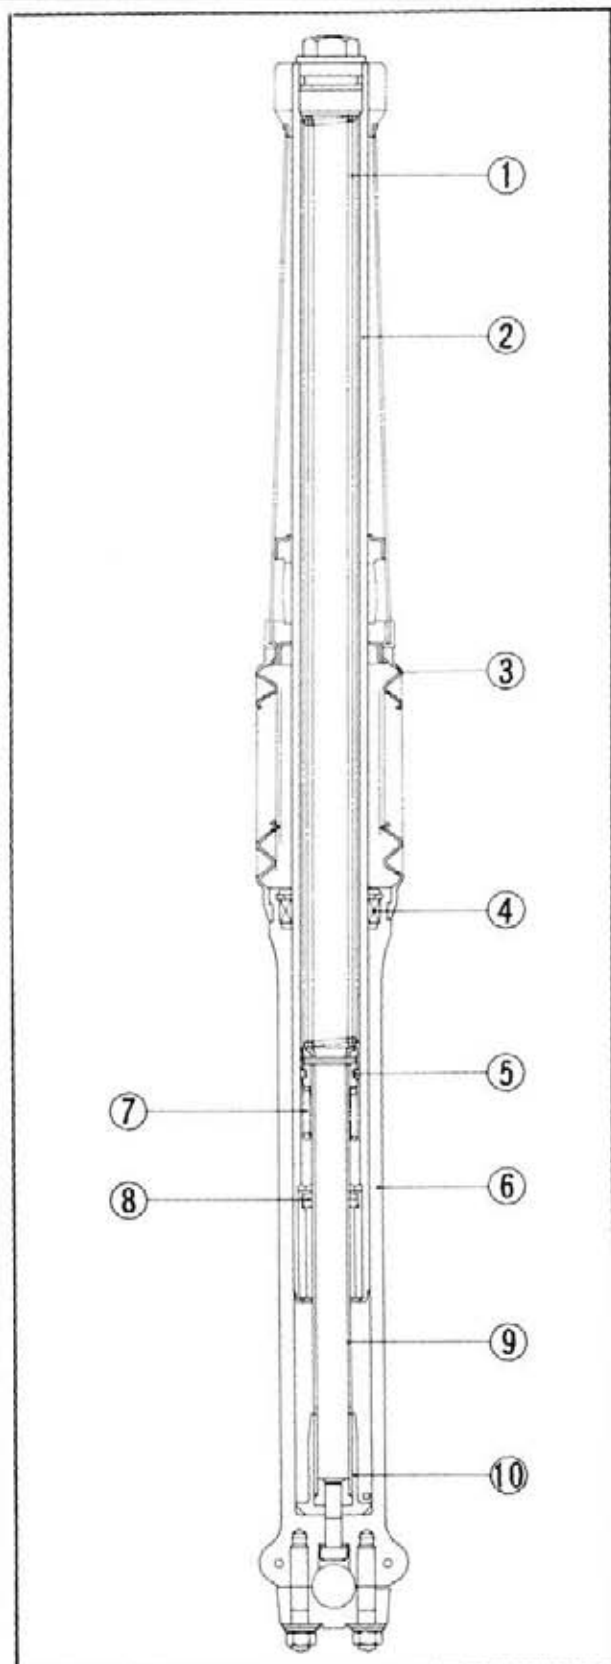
① Front spring ② Front fork pipe ③ Front fork dust seal ④ Oil seal ⑤ Piston ring ⑥ Front fork bottom leg ⑦ Front rebound spring ⑧ Free valve ⑨ Bottom pipe ⑩ Oil lock piece
